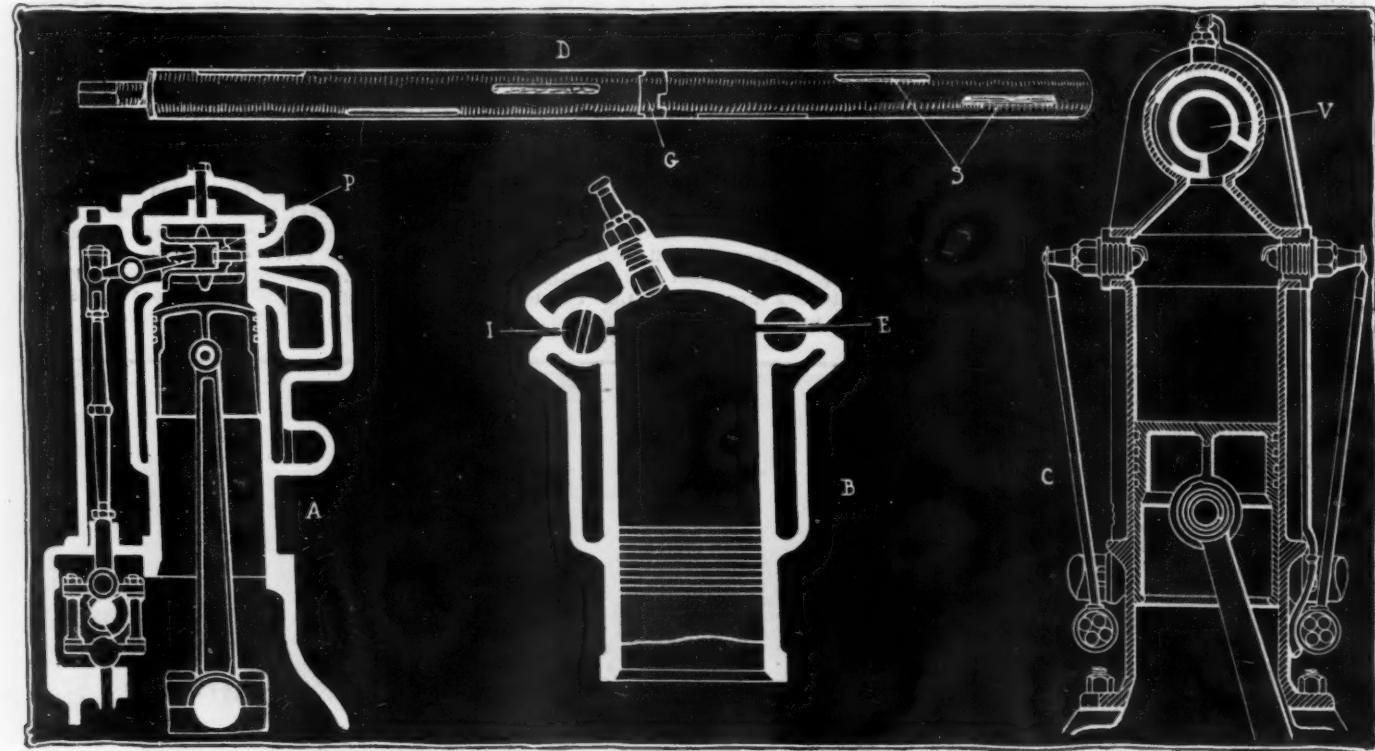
THREE TYPES NON-POPPET VALVE MOTORS
